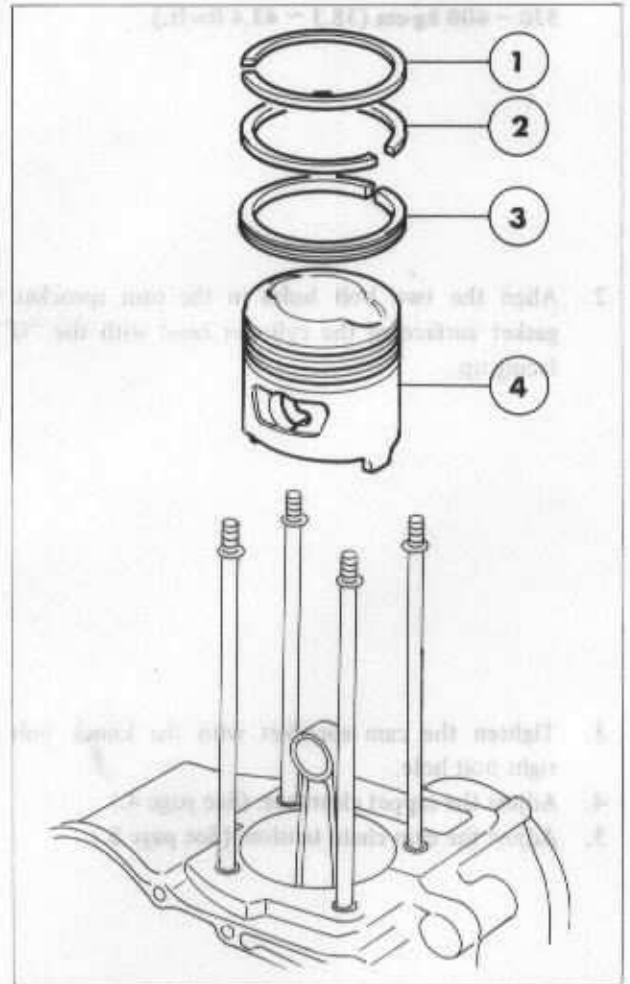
(1) Top ring (2) Second ring (3) Oil ring (4) Piston
